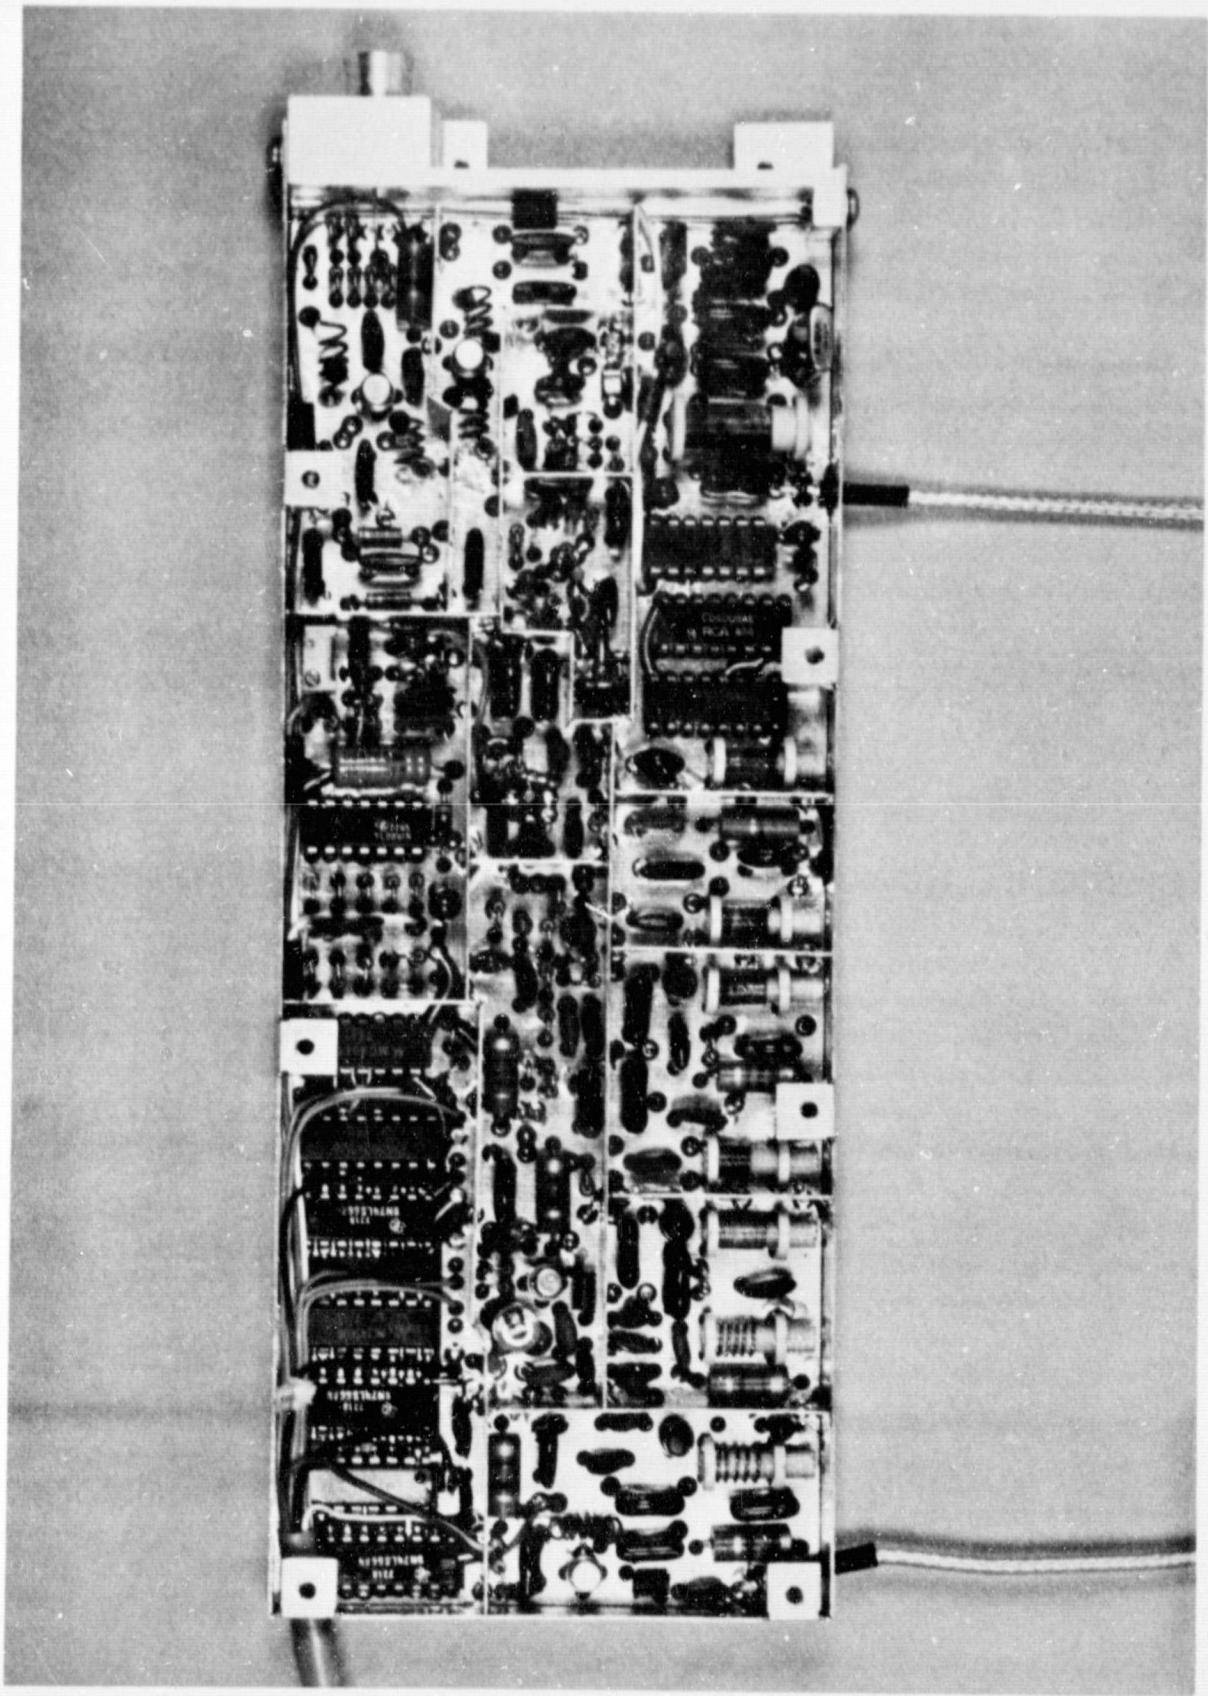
BOARD ASSEMBLY, SYNTHESIZER
